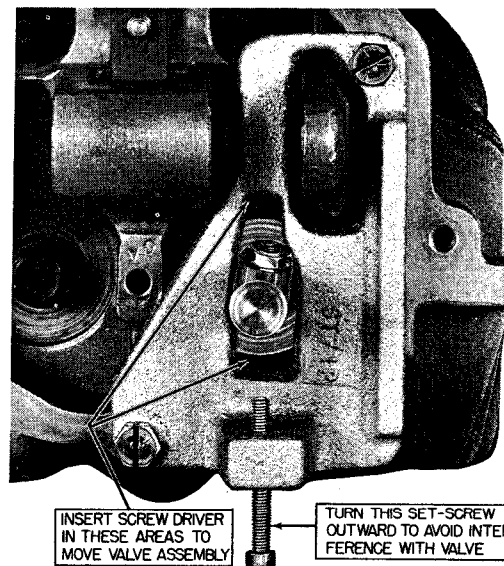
View Showing Area of Exhaust Valve with Components of Gage Fixture Assembled
